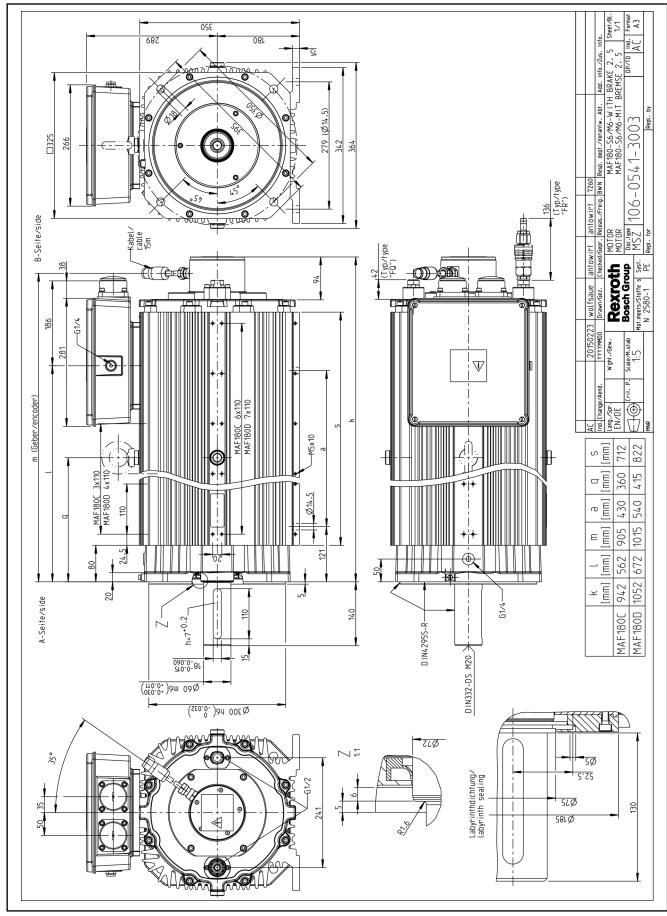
MAF180 with encoder M6/S6 and brake 2/5
